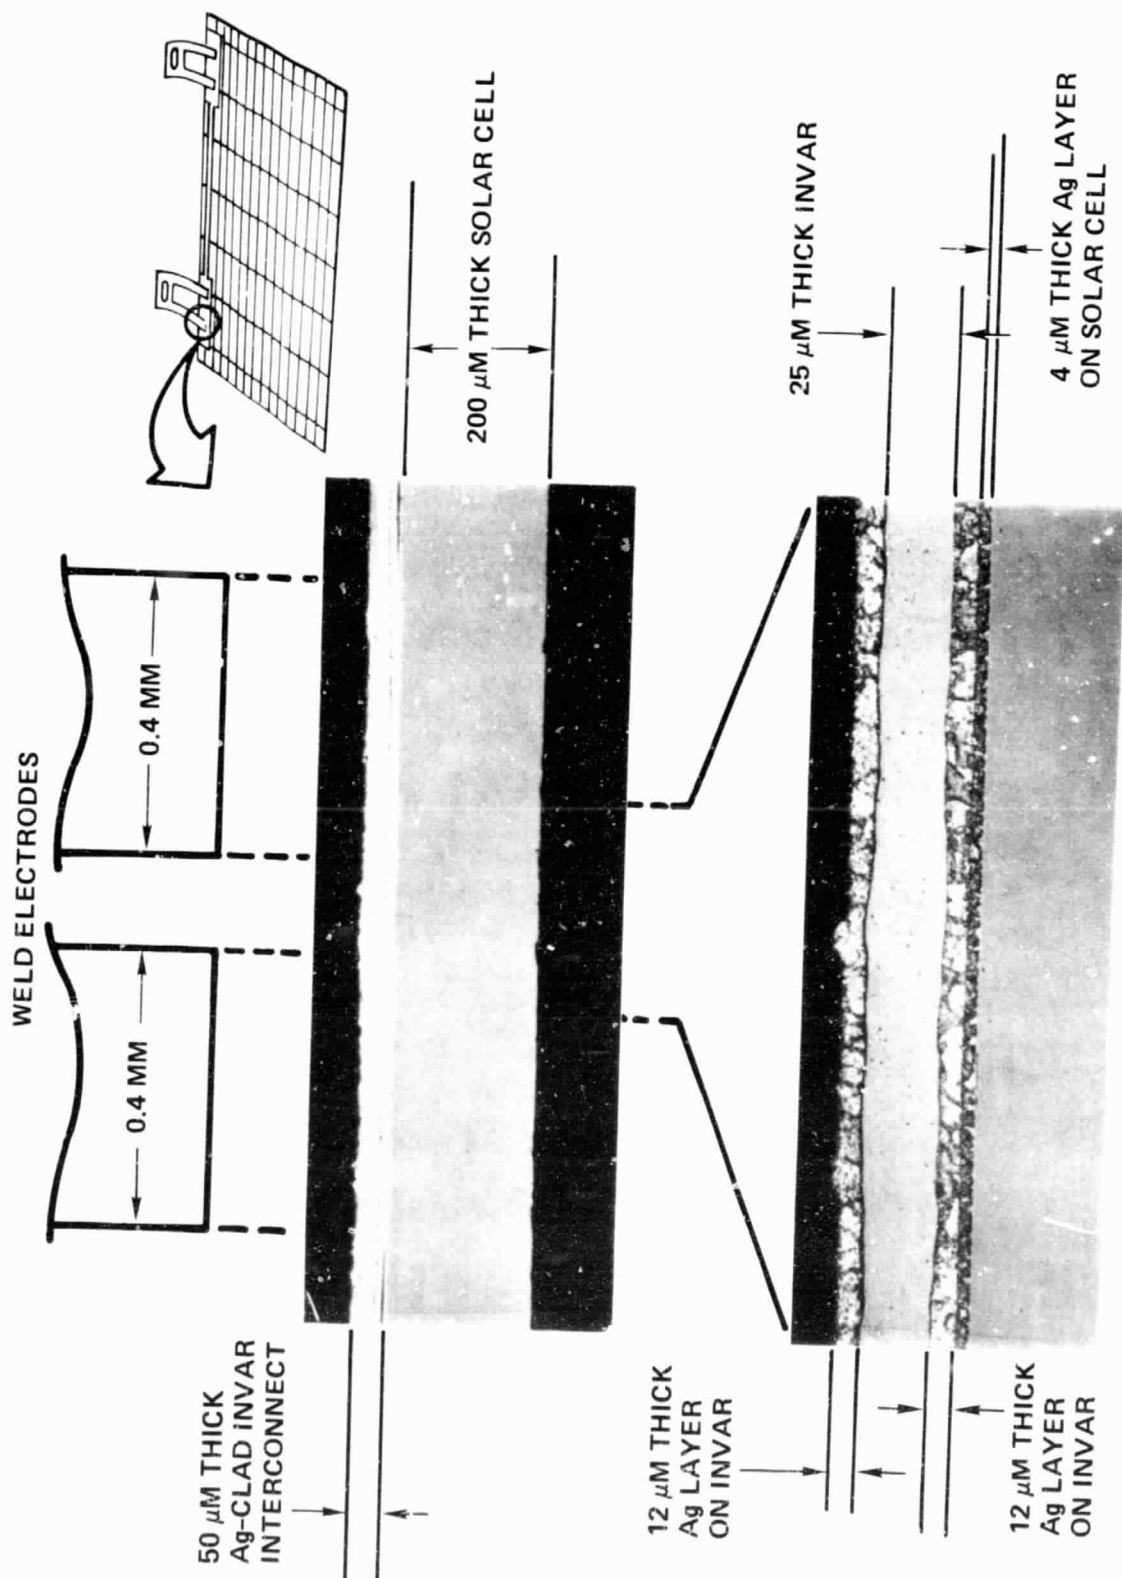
Solar Cell Cross Sections Showing Solid State Welding
